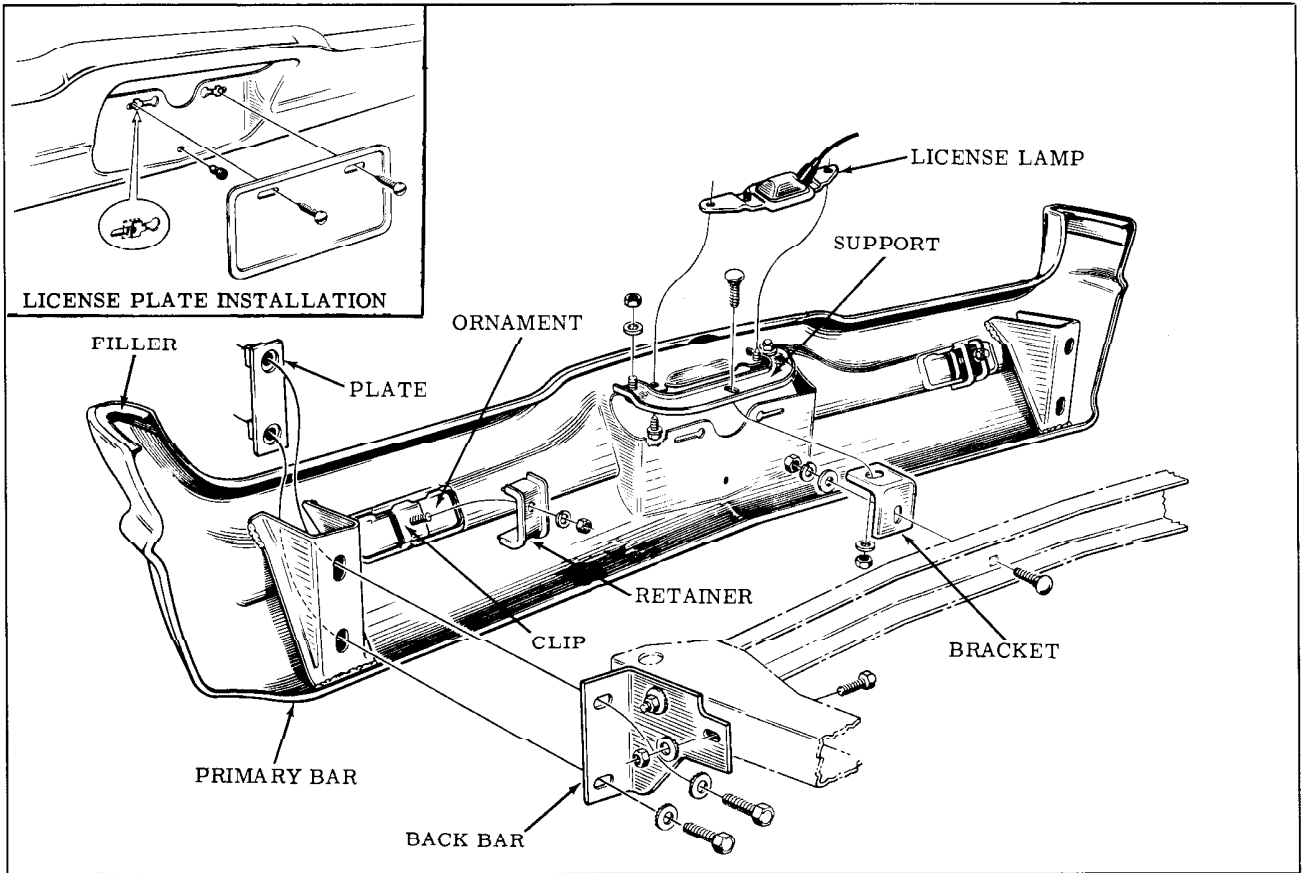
Rear Bumper Assembly (All Except Fiestas)
